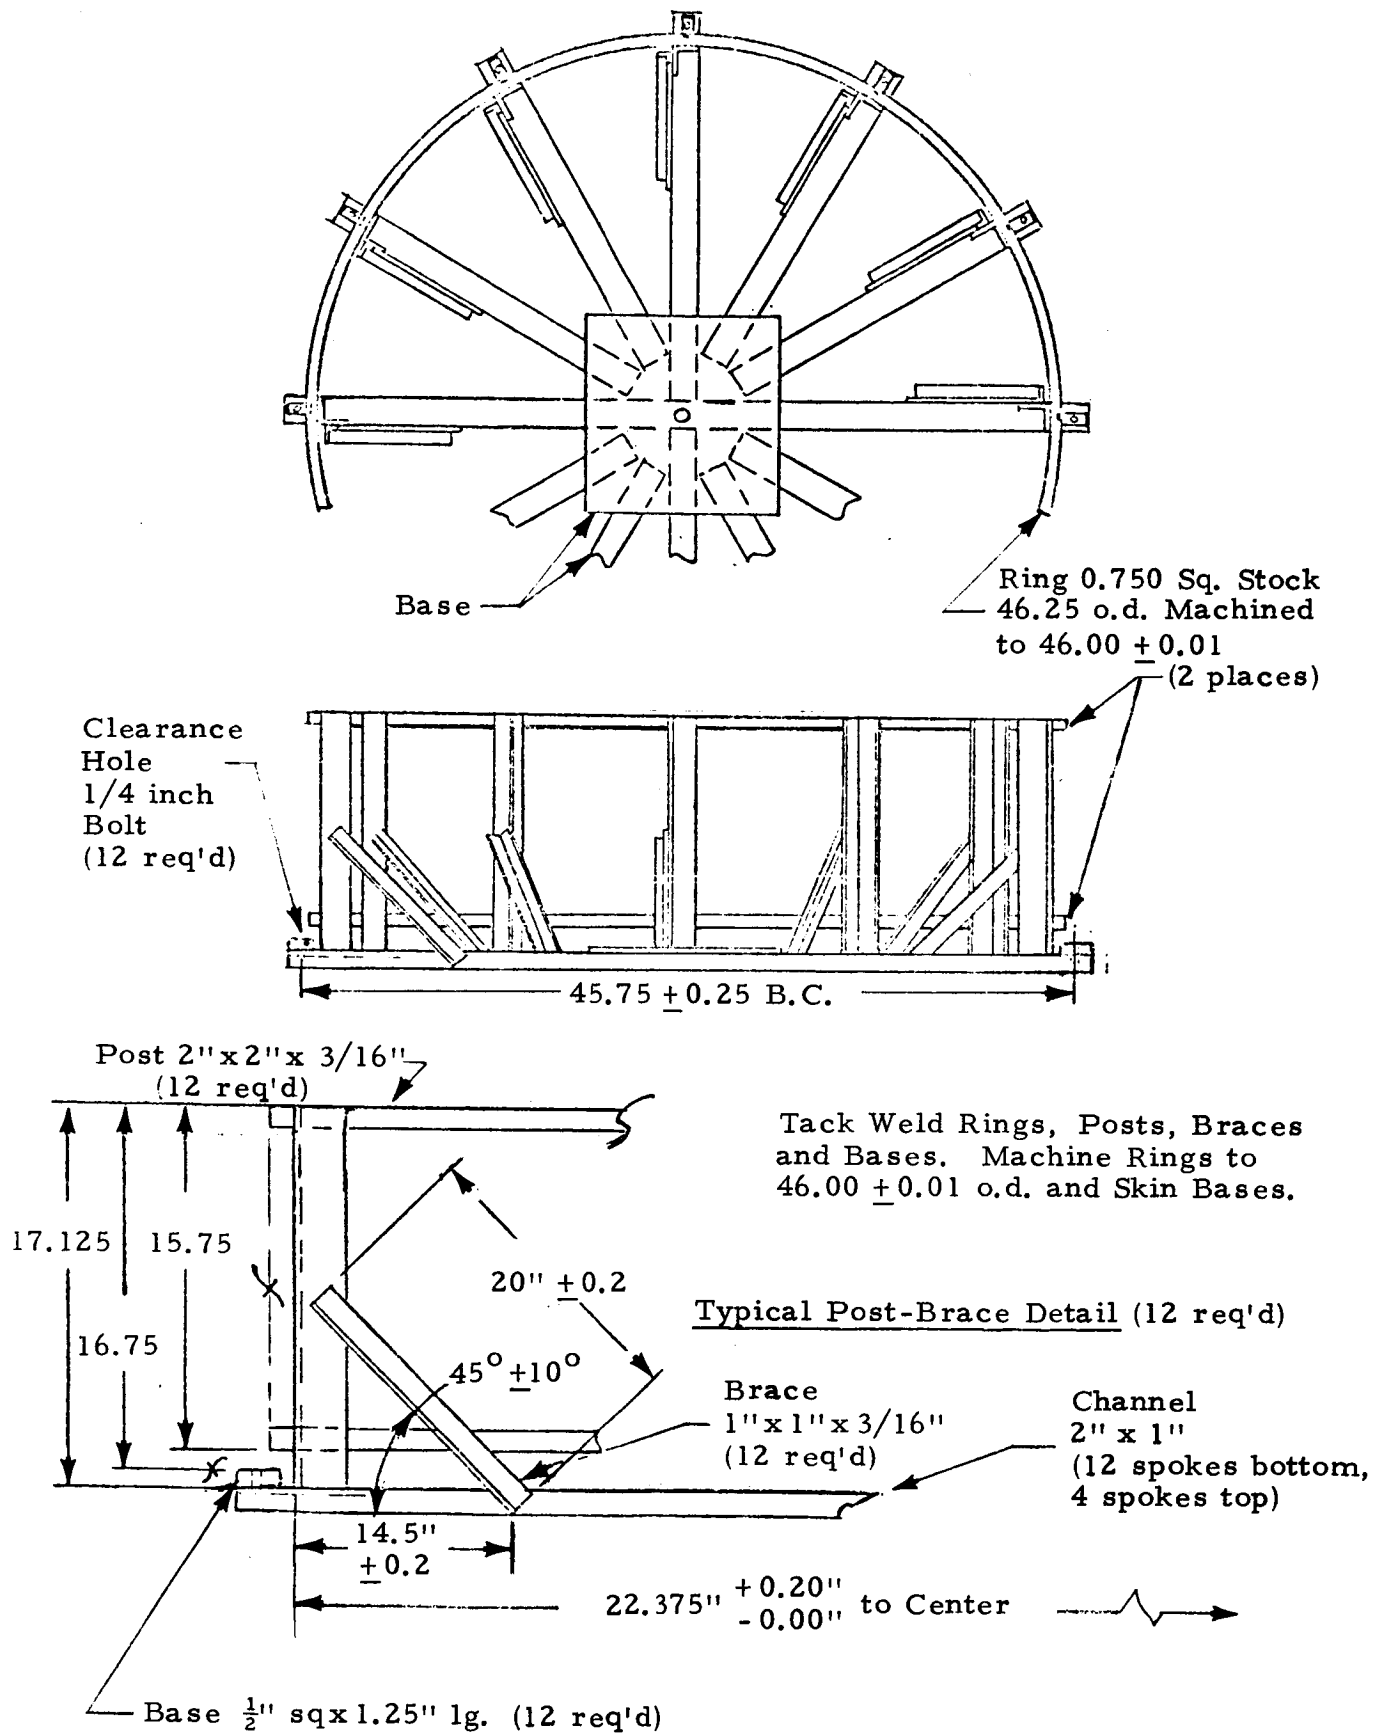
Fixture for Loop Machining and Heat Treatment
